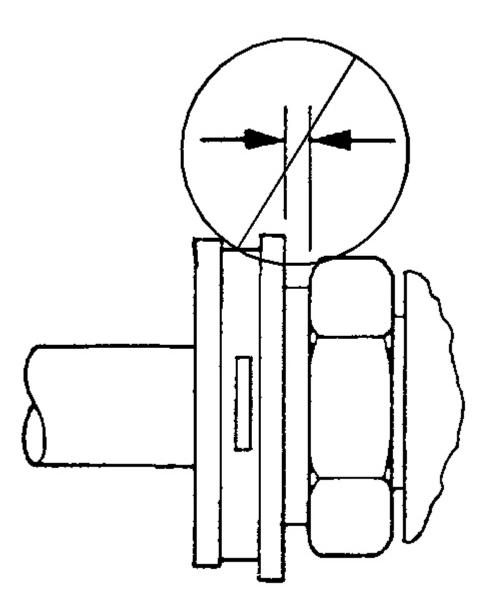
Checking For Gap Between Cap & Fitting Courtesy of GENERAL MOTORS CORP.
